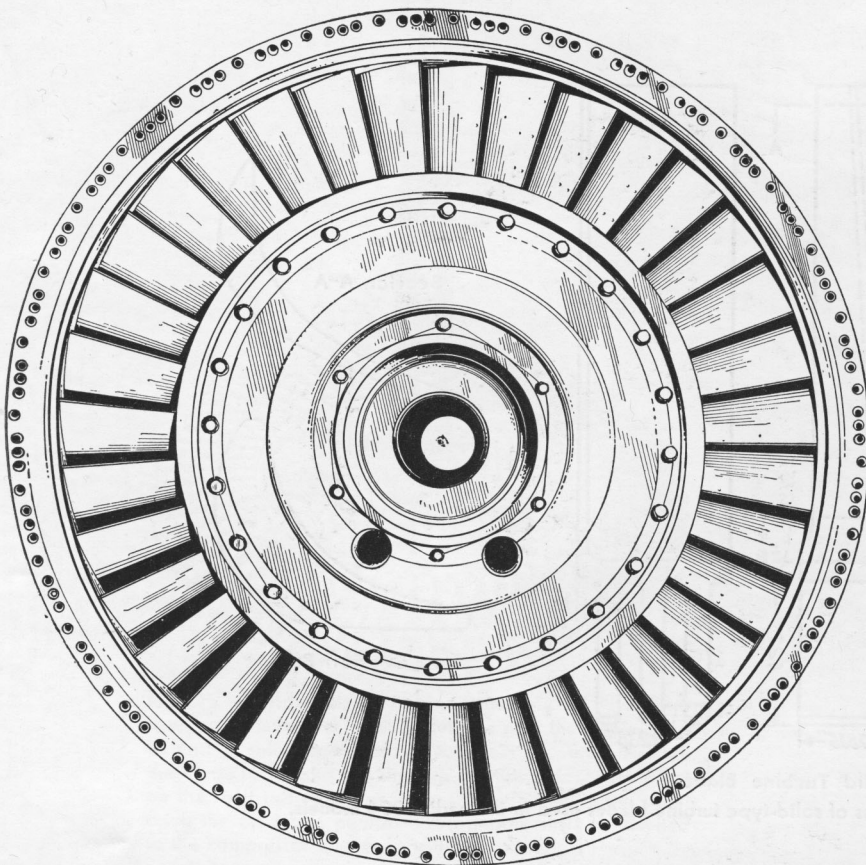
Front view of the Jumo-004 turbine nozzle assembly showing the rear turbine bearing and the diaphragm plates in place. Cooling air enters two holes seen just below the bearing, goes up between the diaphragm plates and through the nozzle roots, and goes out through openings in the T.E. The assembly is attached to the combustion chamber casing by means of 36 boltholes in the outer rear flange. Note the 36 series-of-three holes for carrying exhaust system cooling air.
